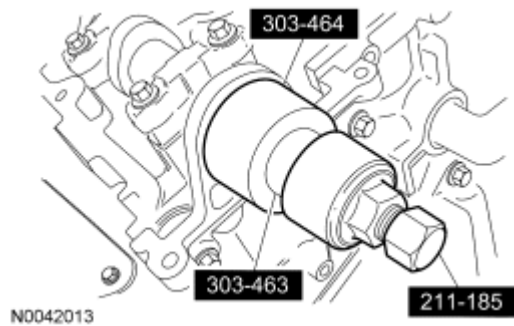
Identifying Special Tools (303-463, 303-464 And 211-185)
